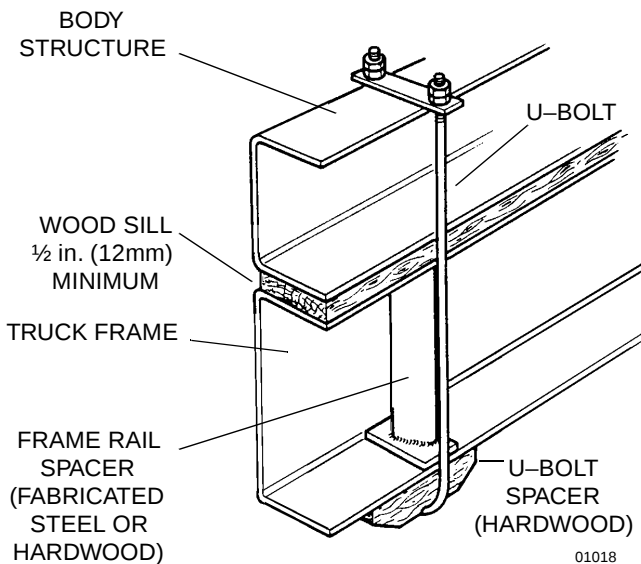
Acceptable U-Bolt Mounting with Wood and Fabricated Spacers.
